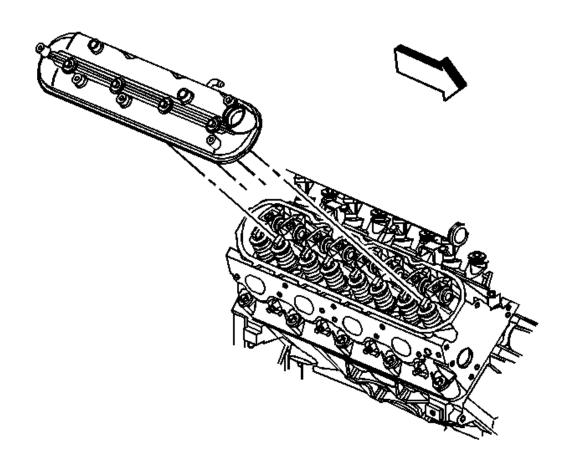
View Of Valve Rocker Arm Cover (Right) Courtesy of GENERAL MOTORS CORP.
